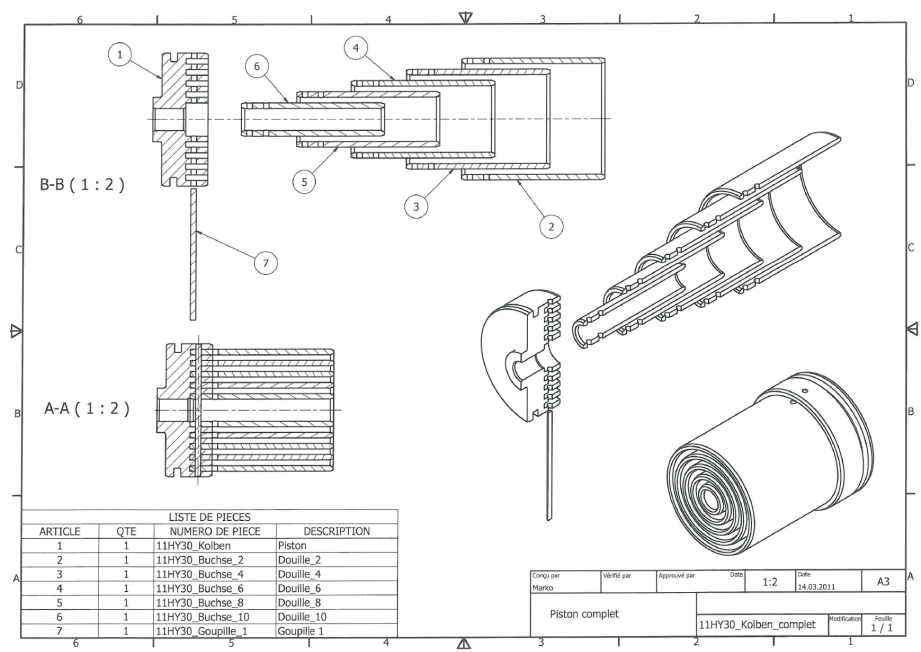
Technical drawing of the finned piston (Exploded view).
